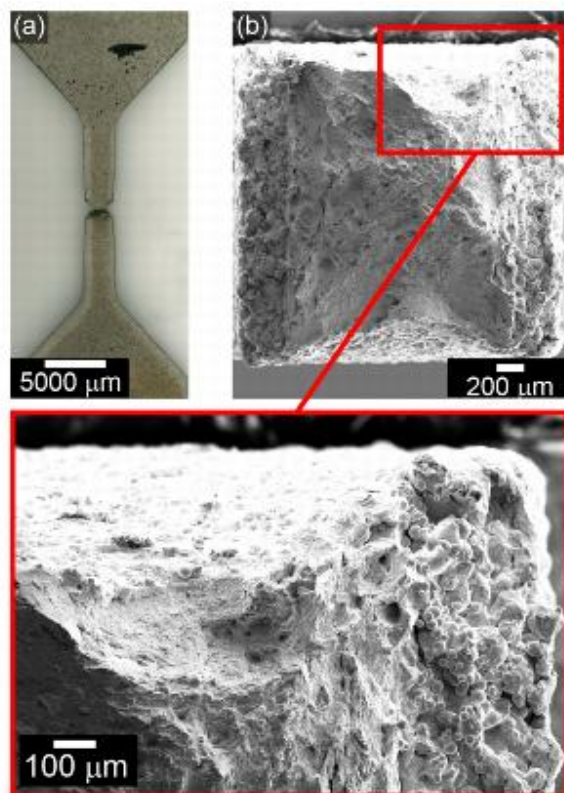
Post-test notch tensile specimen fracture shape and fracture surface characterization. (a) Fracture shape of specimen NA05 and (b) fracture surface morphology with zoom in on the notch region.
